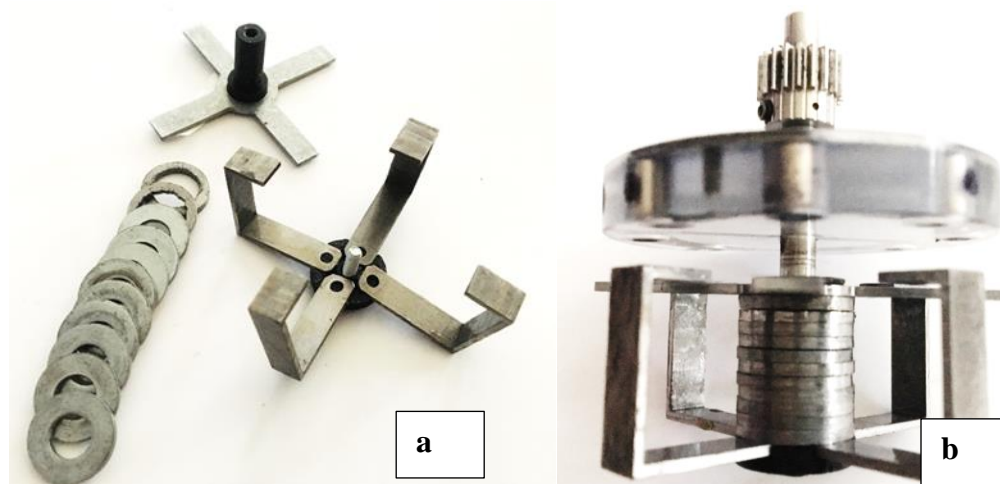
Stator materials for the improved generator design with laminated core. (a) Laminated core and top and bottom flanges (b) generator stack-up without the coil
